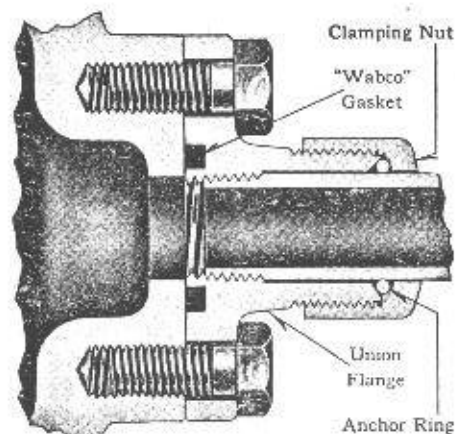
Sectional View of the Reinforced Flanged Straight Fitting Connection
